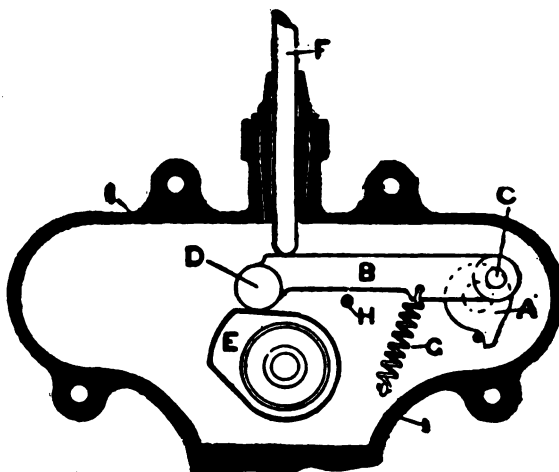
THE DE DION EXHAUST VALVE REGULATOR.
